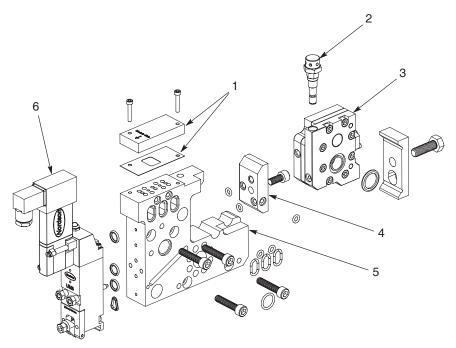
Components typically mounted on a manifold slice (flange-mounted solenoid valve shown)
